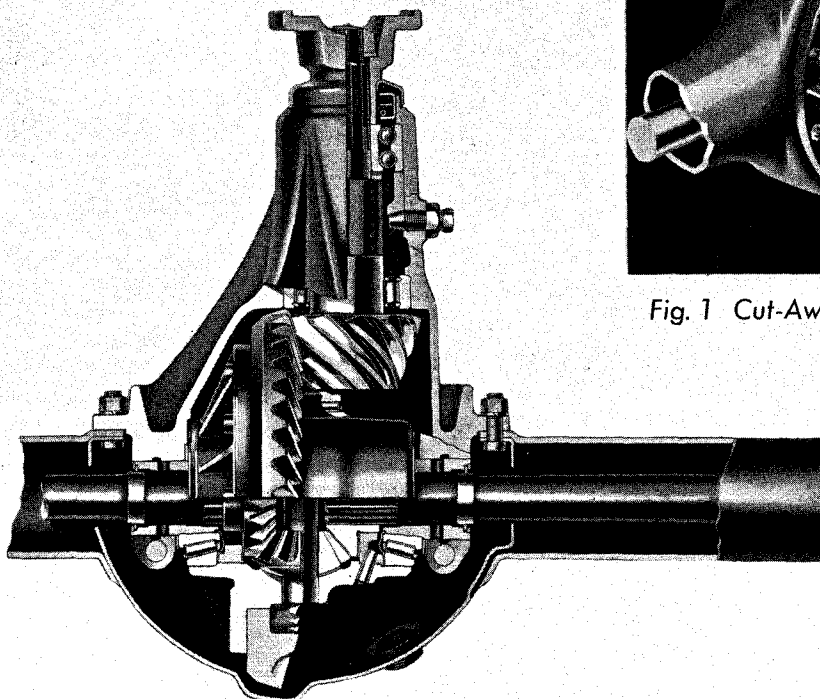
Cross-Sectional View of Hypoid Rear Axle
